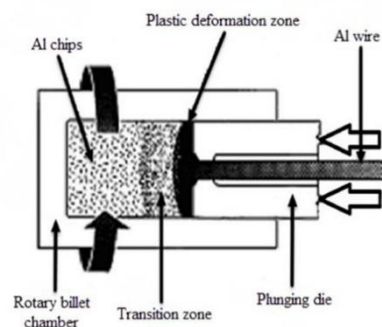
The main components of friction extrusion a) rotary billet chamber b) plunging die
